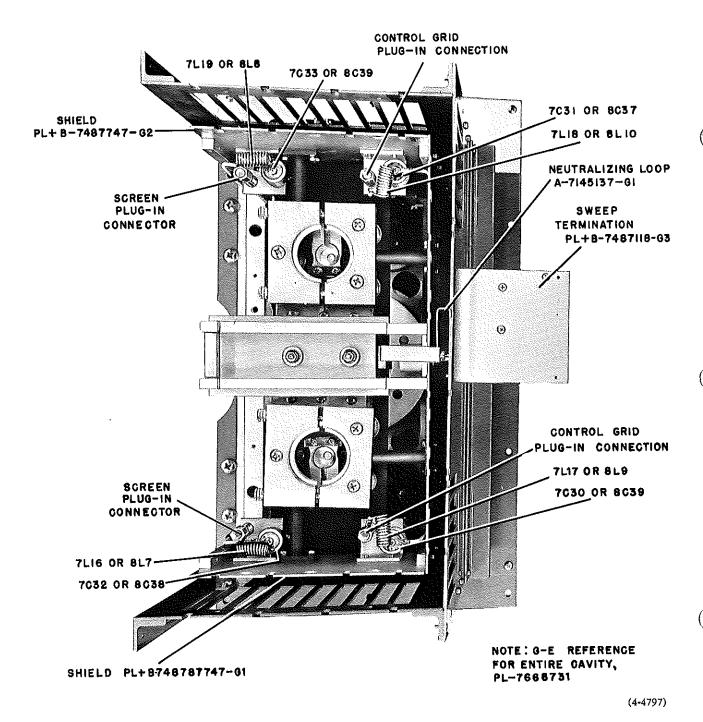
Cavity in Process of Construction: Contact Assemblies Lacking, Bottom View
